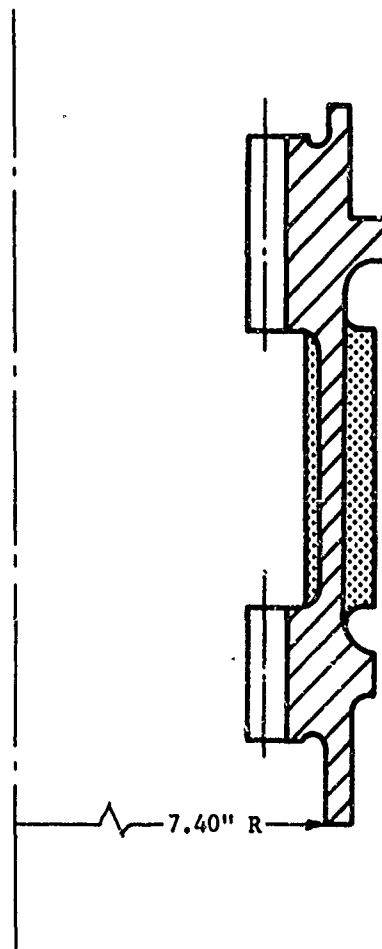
UH-1D Ring-Gear Casing With Center Section Modification.
